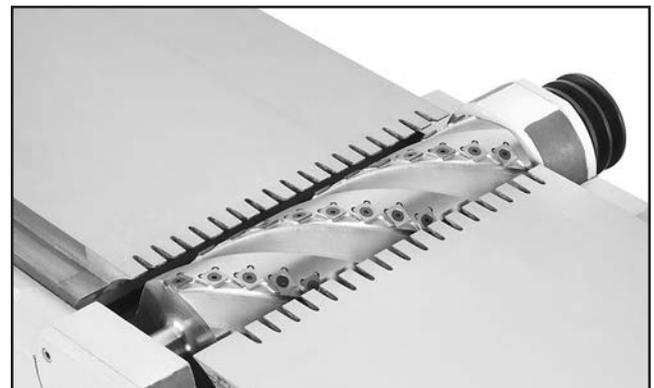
T27696 helical cutterhead secured with hex bolts and lock washers.
